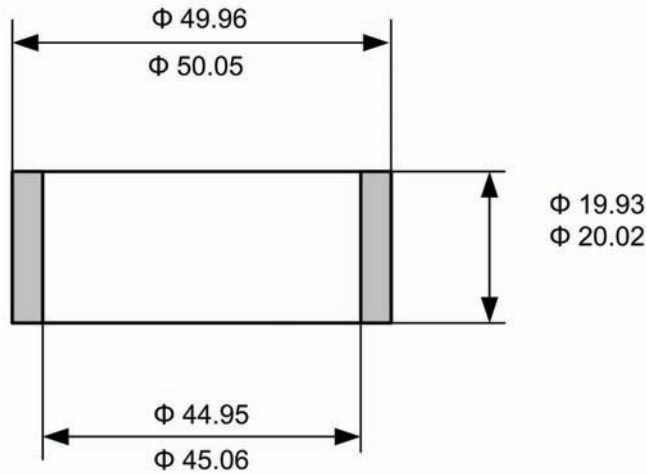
Drawing B – actual production sizes - all dimensions are in mm
